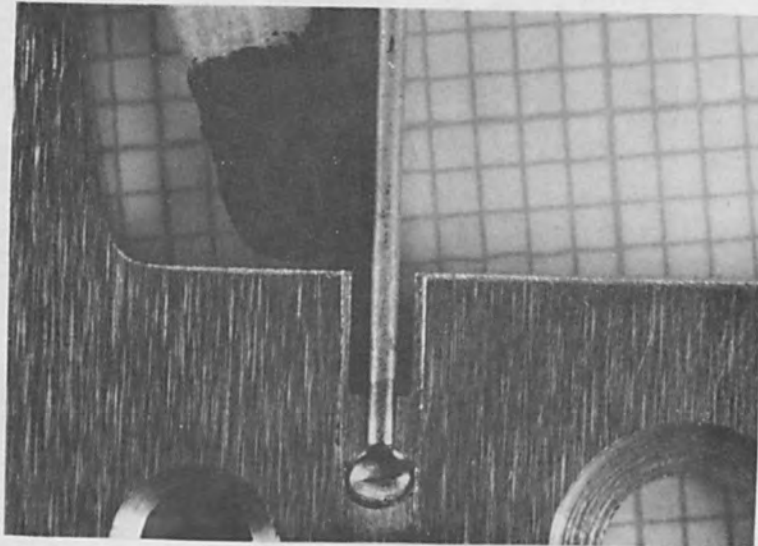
Electron beam spot weld of socket and leaf spring (top view).
